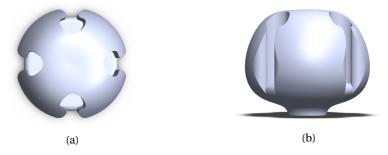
The revised bladder core design, giving laterally stiffening braces to the silicone mould.
